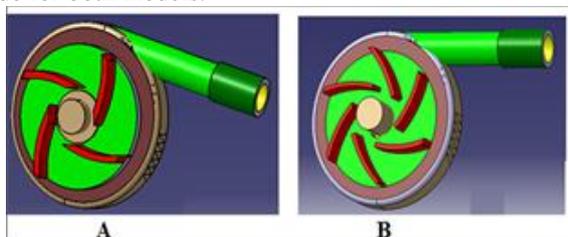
(A) Assembly of four blades, (B) Assembly of six blades model.
